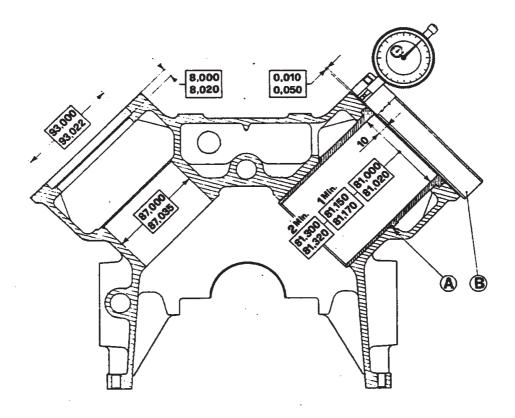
LINER HOUSING IN CRANKCASE. A - seal ring; B - gauge 542-CS-6768.
